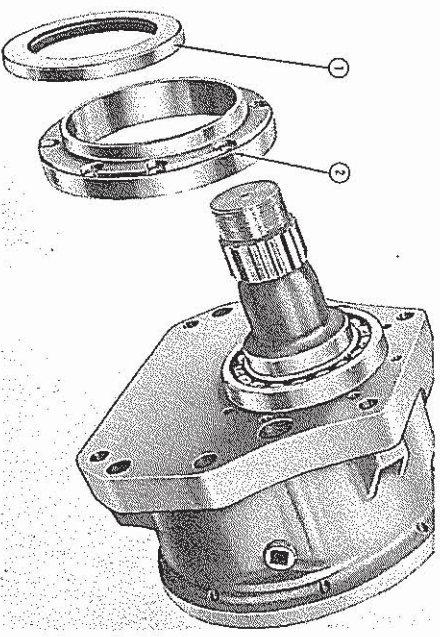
OIL SEAL AND RETAINER, REMOVED
